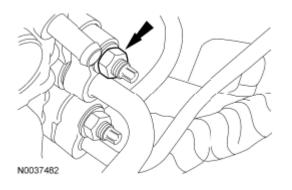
Locating Knock Sensor (KS) Electrical Connector Courtesy of FORD MOTOR CO.
